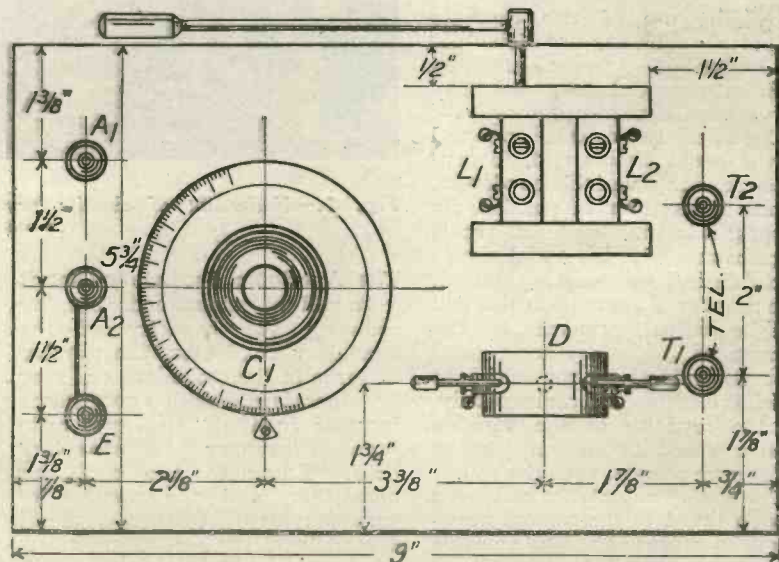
Dimensioned plan of receiver showing disposition of components.
